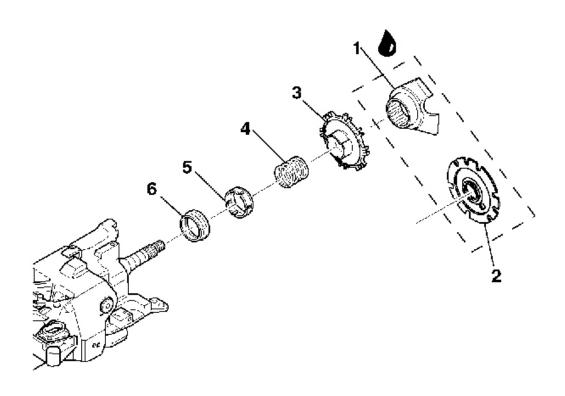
Installing Inner Race, Upper Bearing Inner Race Seat & Upper Bearing Spring
